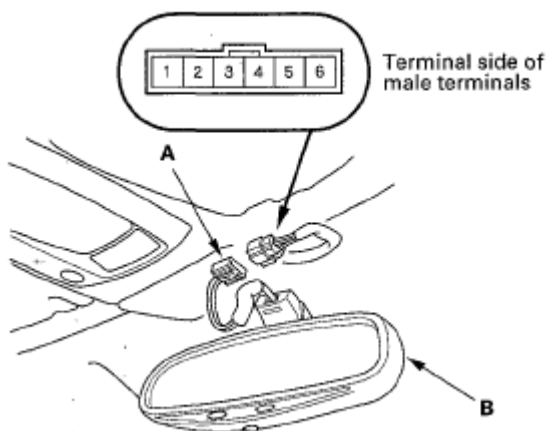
Identifying Automatic Dimming Inside Mirror And 6P Connector
